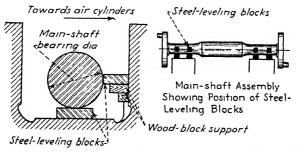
Use steel leveling blocks to center the main shaft. (Courtesy of Pennsylvania Pump & Compressor Co.)
